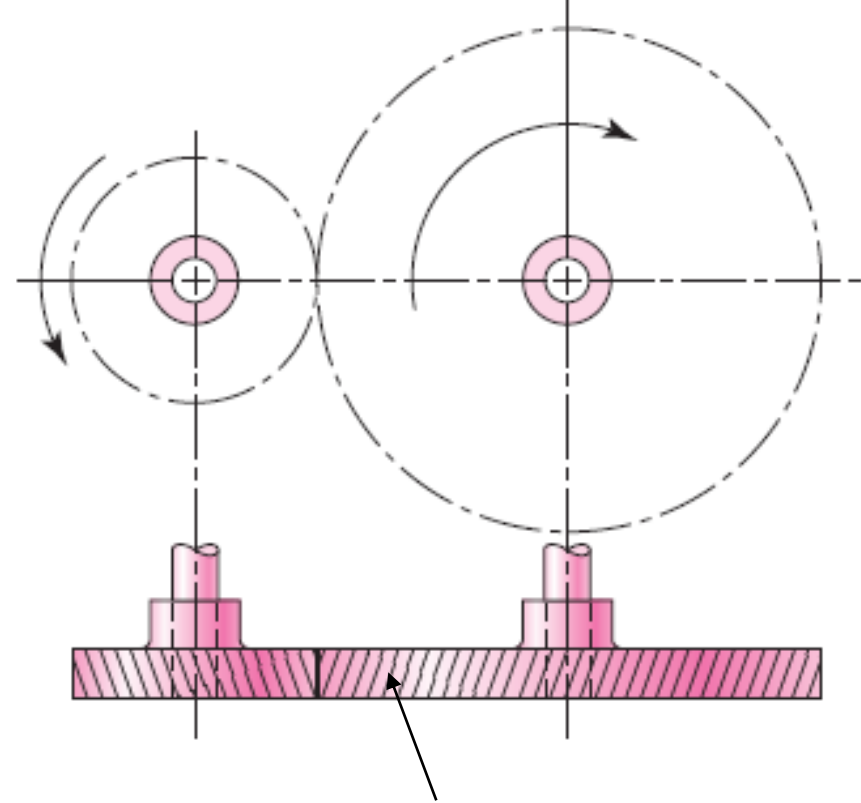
Helical gears are used to transmit motion between parallel or nonparallel shafts.
